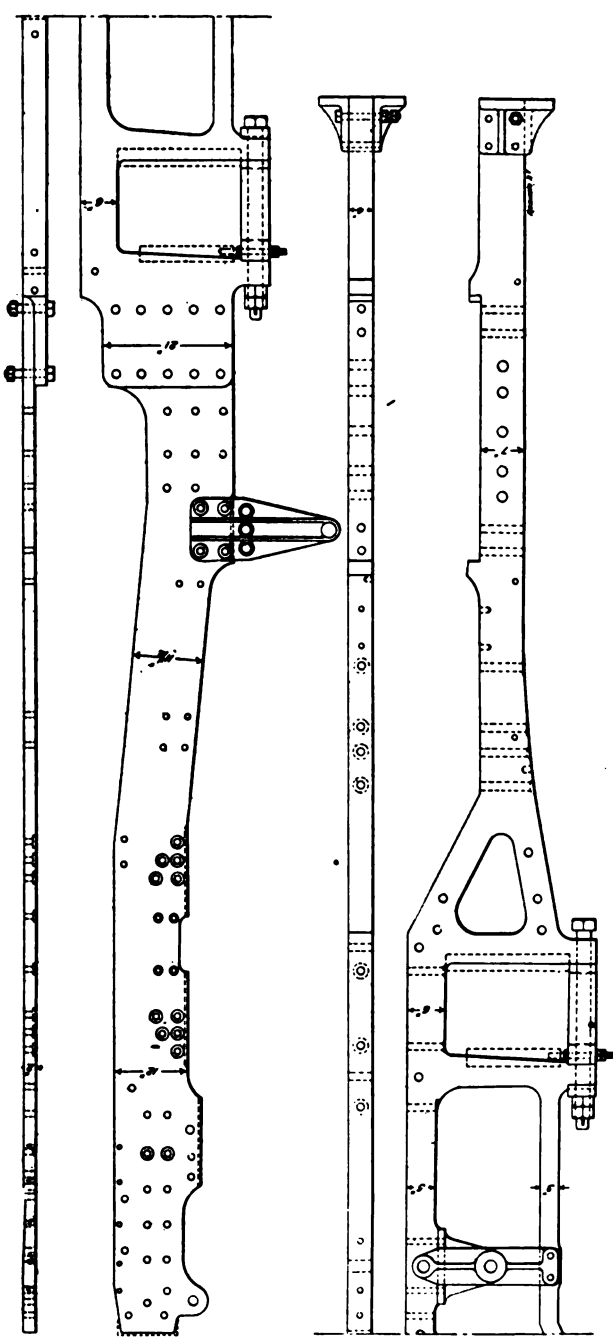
Frame for Atlantic Type Passenger Locomotive
